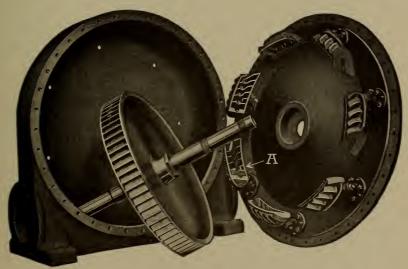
Parts of Sturtevant Single-Stage Turbine Courtesy of B. F. Sturtevant Company, Hyde Park, Massachusetts
